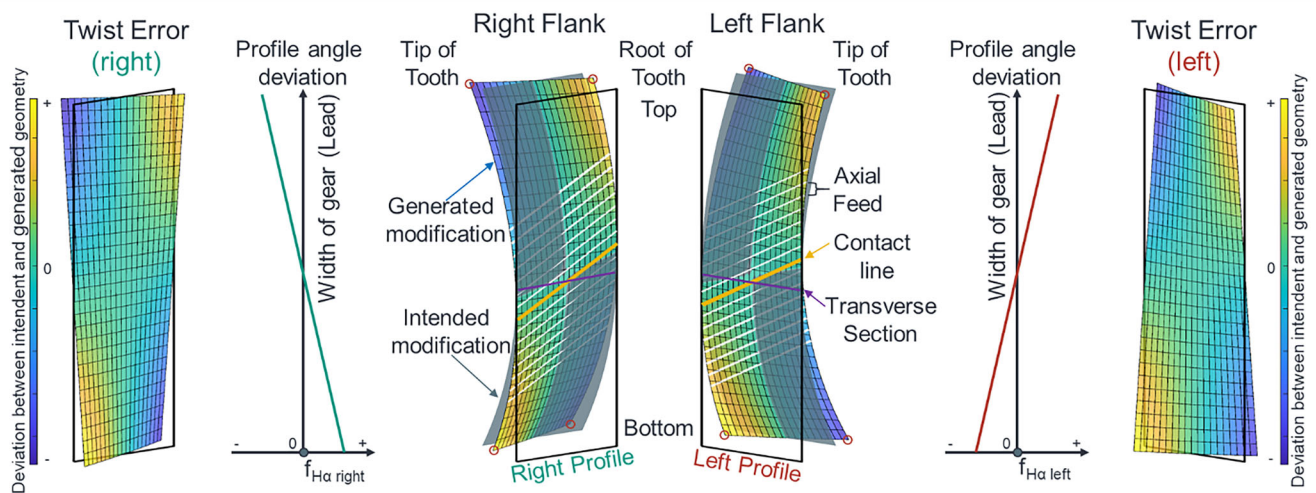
Flank twist in a tooth space manufactured with a lead crowning
